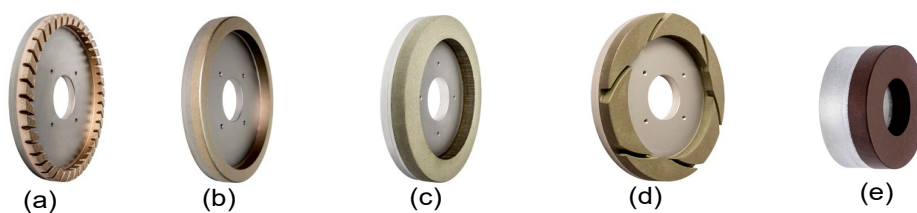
Rectification wheels for: (a) Hard roughing. (b) Medium roughing. (c) Prefinishing. (d) Finishing. (e) Chamfering. [9]
